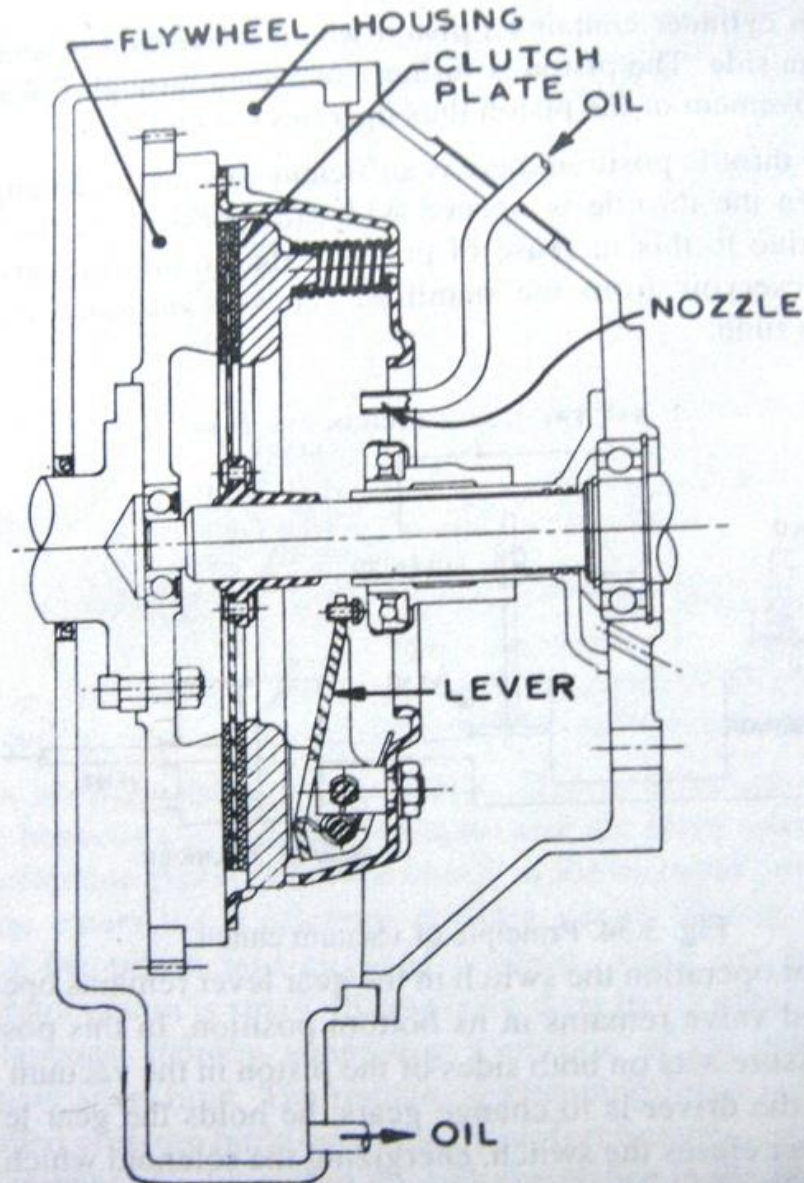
Spray type, single plate wet clutch (Ref 2)
